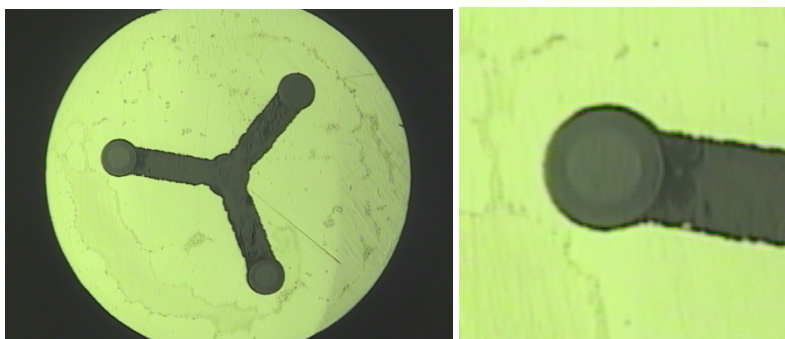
Left: prototype snowflake ferrule fabricated using wire EDM in the UW physics machine shop. Right: microscope image showing a mounted 120 μm fiber.
